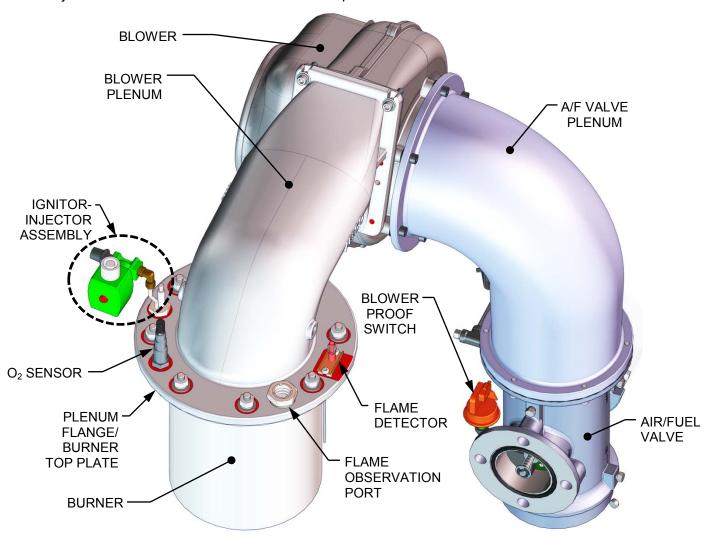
Benchmark 1500/2000 Burner Assembly (Removed from Boiler)
